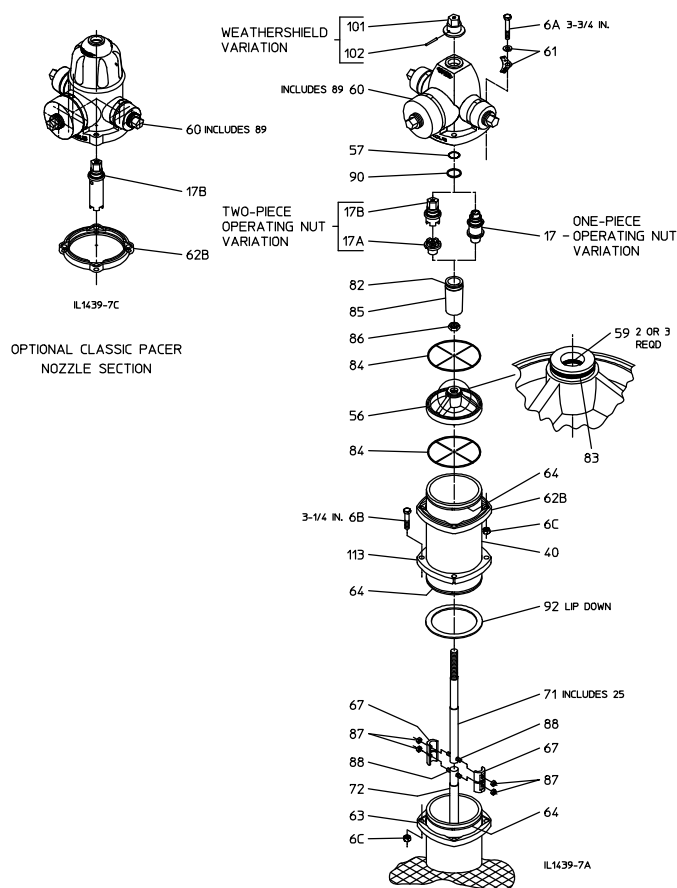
Upper Standpipe (Breakable Flange Orientation)
